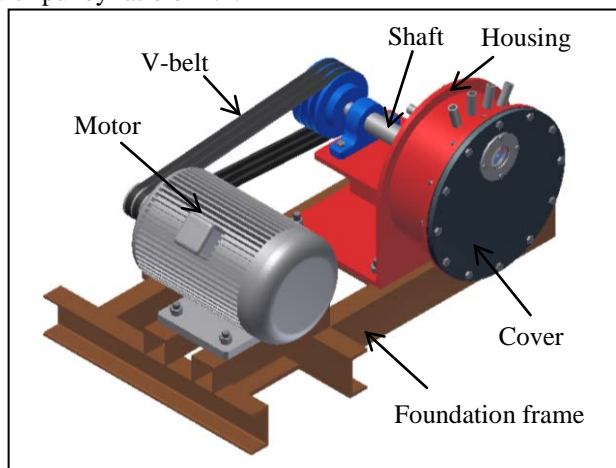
3D CAD model of Rotating Disc Apparatus.
